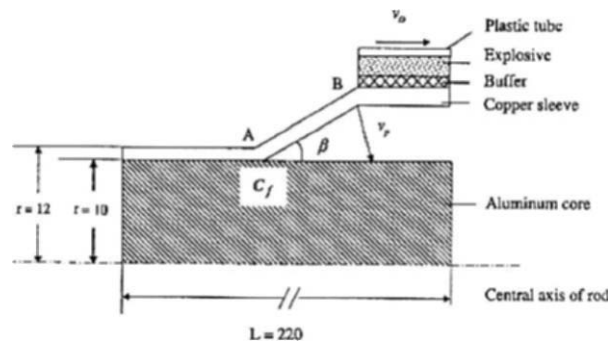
Arrangement for explosive welding of an aluminum core and a copper sleeve (all dimensions in mm) [86].
